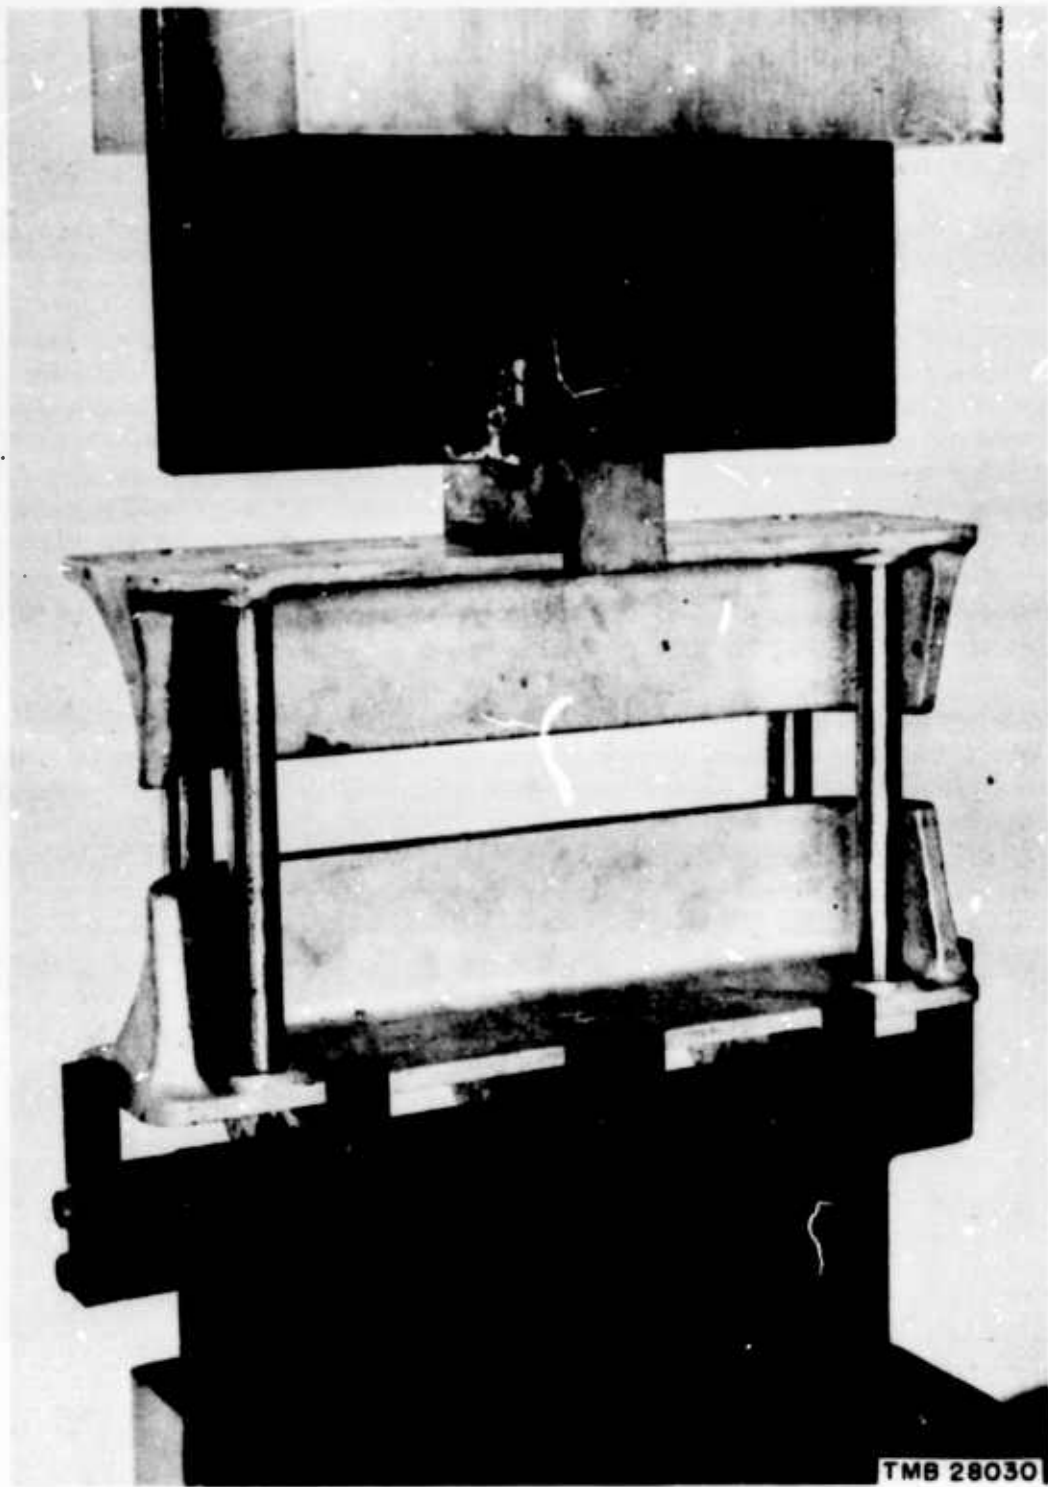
Grousers Mounted for Testing in Alternating-Load Machine
